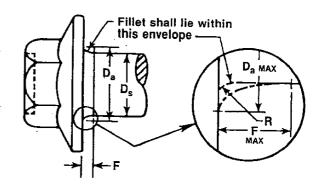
STYLE 'A' FILLET DETAIL FOR SHORT SCREWS
